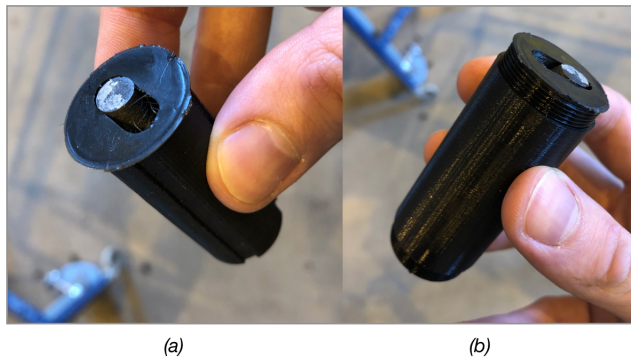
(a) Flexible stator. (b) Flexible stator and housing assembled together.
